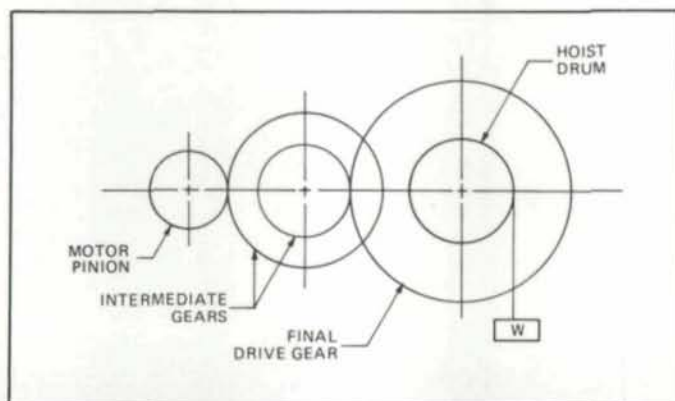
Ratios of the gear teeth in this hypothetical hoist drive would depend upon weight (W) to be lifted and torque (T) available from the motor.
